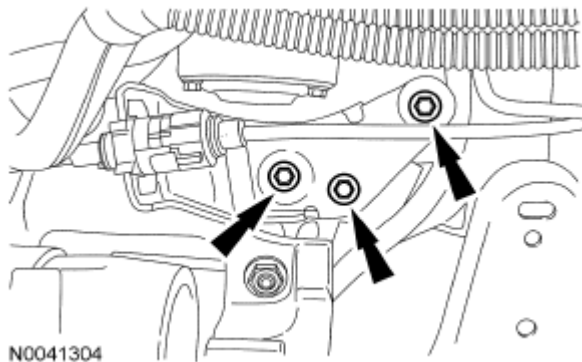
Locating Transaxle Control Cable Bracket Bolts
